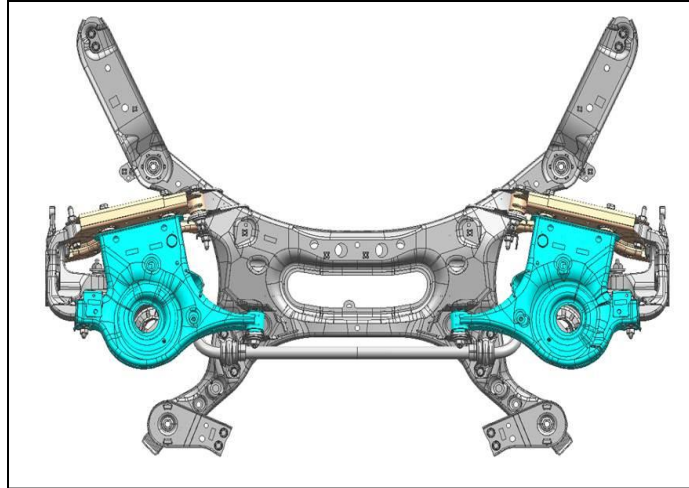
Rear Lower Spring Links and Rear Suspension Cross Member Assembly
